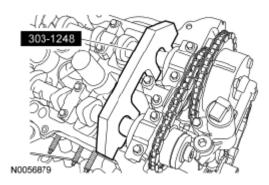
Identifying Camshaft Holding Tool Courtesy of FORD MOTOR CO.
